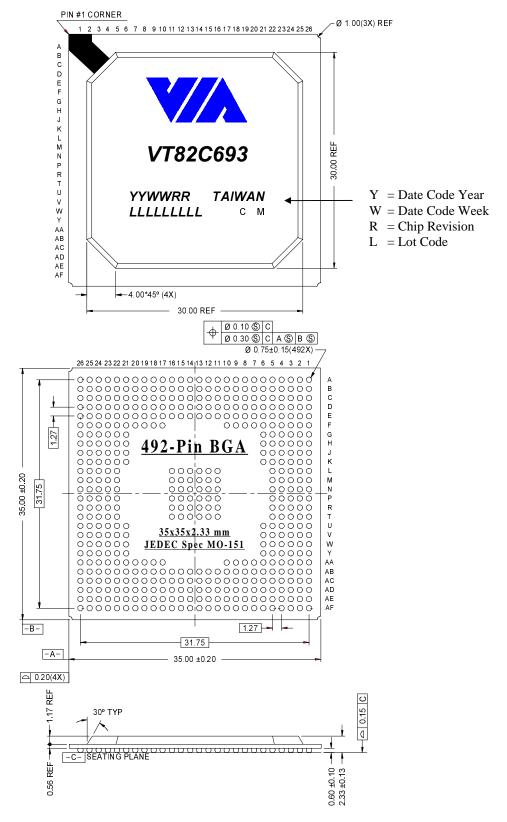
Mechanical Specifications - 492-Pin Ball Grid Array Package
